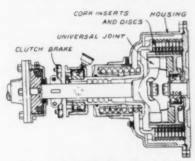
Multiple-Disc Clutch With Cork Inserts
